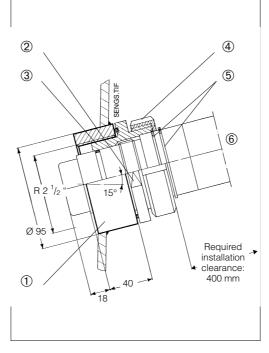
(left) AFS-V adapter, stainless steel (1.457) for flange mounting of Sensopac CPA 320
